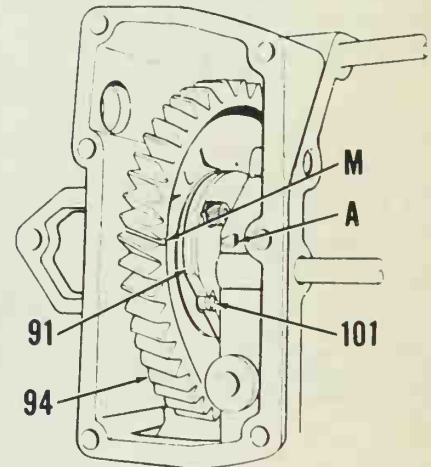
Mate camshaft (91) with gear (94) as outlined in text.
